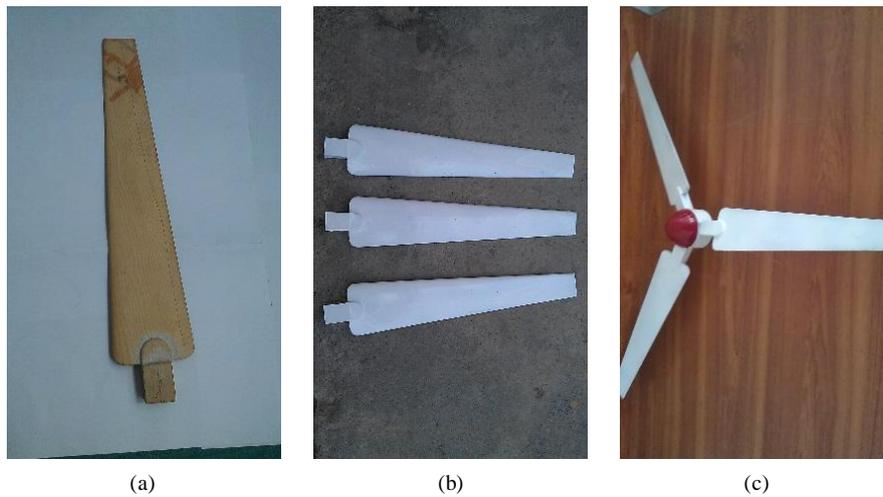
(a) Wooden blade pattern, (b) Aluminium casted blades, (c) Propeller of wind turbine.
